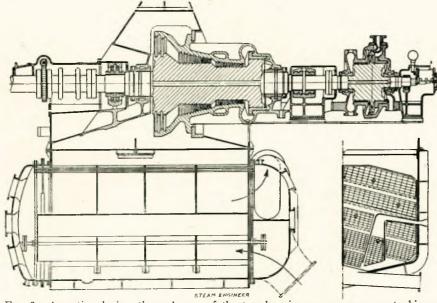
A sectional view through one of the two-housing excess pressure turbines.
